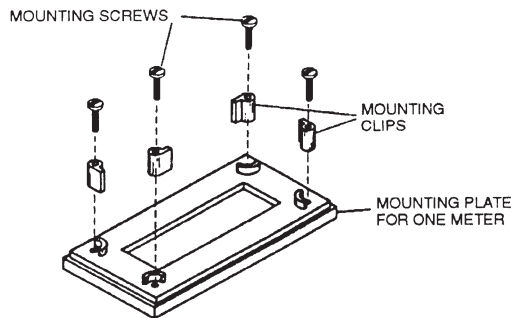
Adaptor Assembly for 1/8 DIN Panel Cutout (DP116 -PB1 for one meter)
